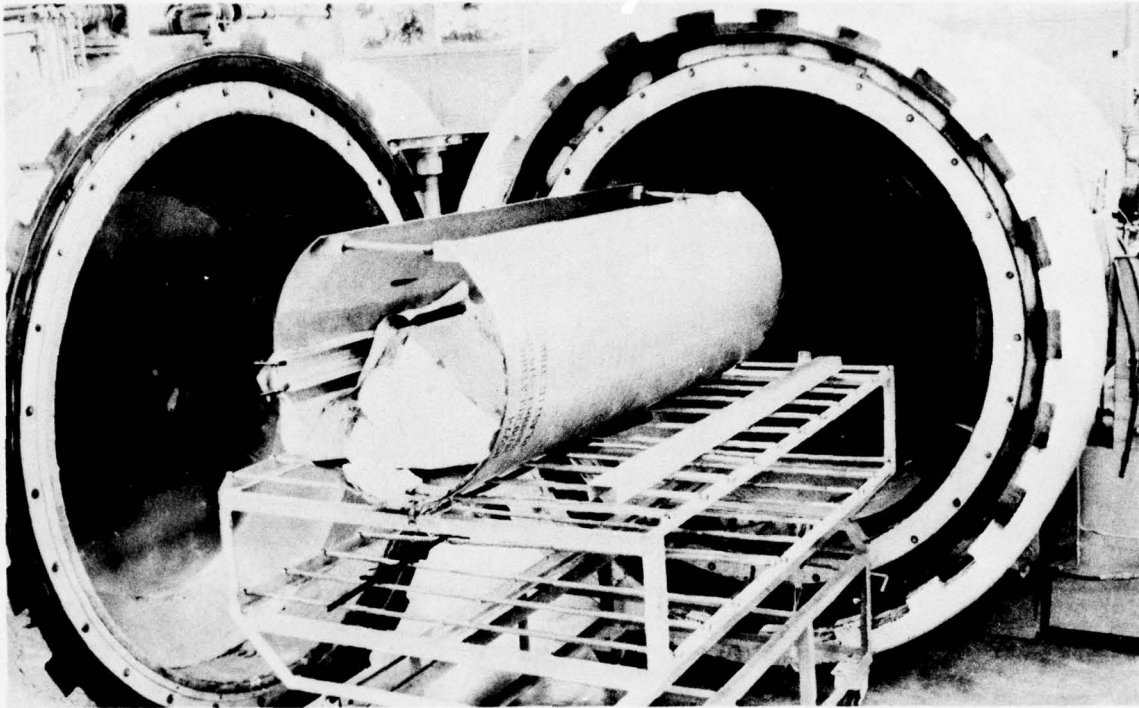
Post-Forming and Fusing Tool for Component Skins
